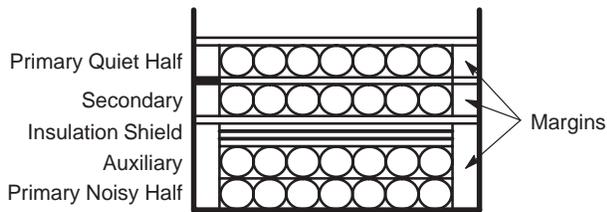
Transformer Shield Placement for Margin Wound Transformer.
